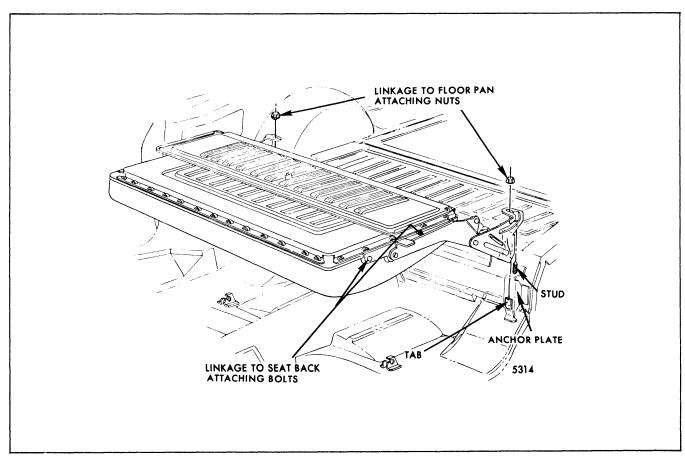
Folidng Rear Seat Back Hinge and Linkage
